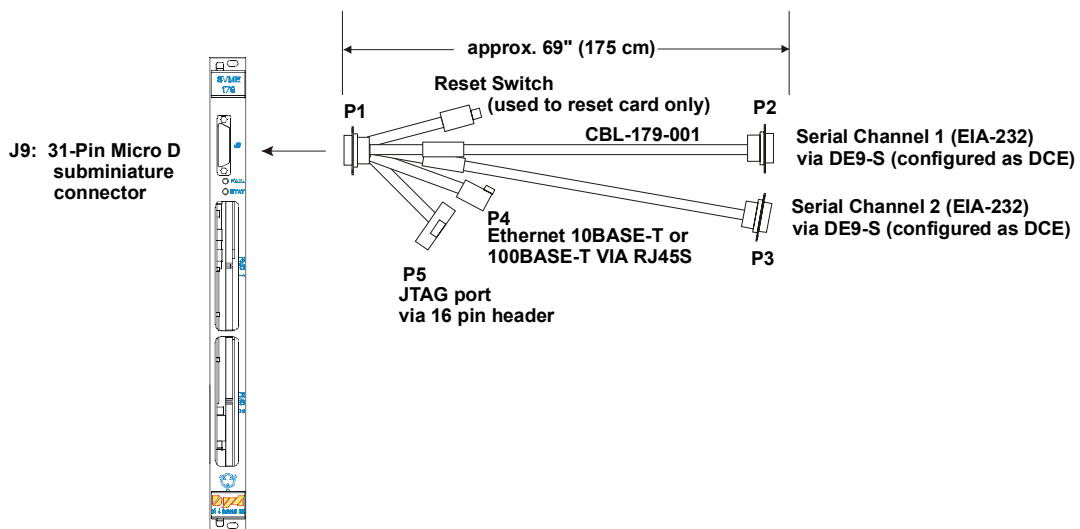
SVME-179 Front Panel I/O Cable (CBL-179-001)
